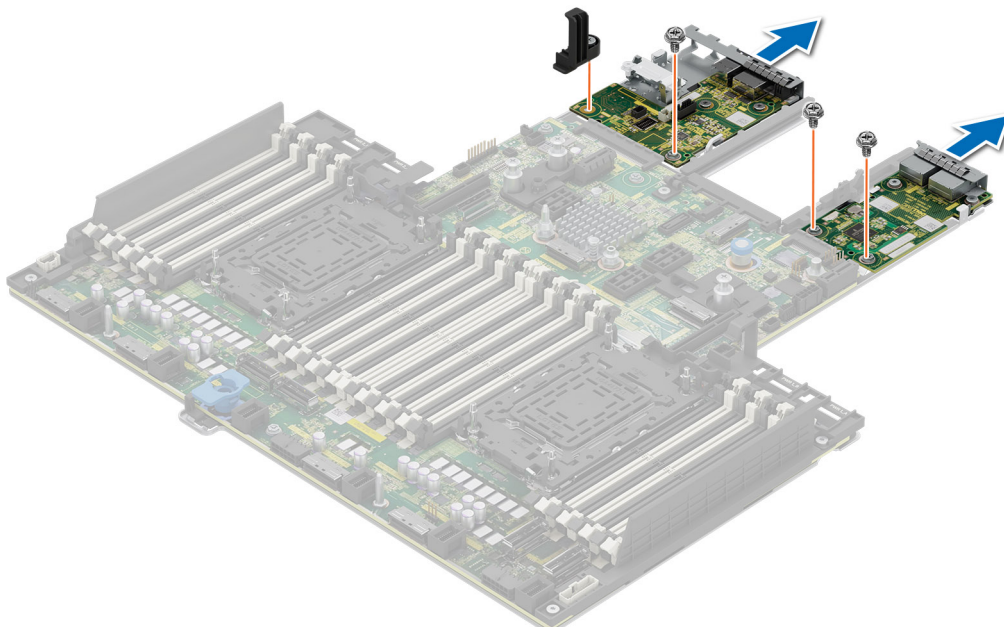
Removing the LOM card and liquid cooling rear I/O board
